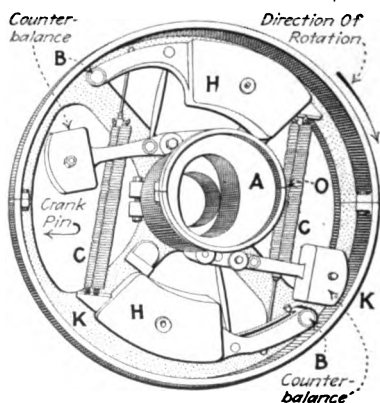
Fitchburg governor. (The legend "Crank Pin" means that the crank pin is located in the position indicated by the arrow. The crank pin is not shown.)
